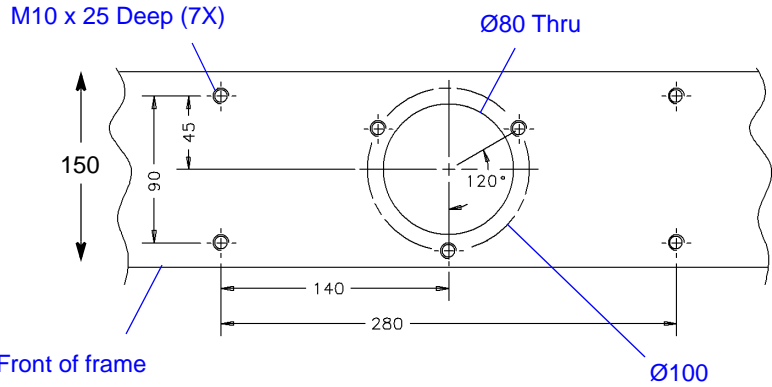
Series 5560 - Moving Crosshead Mounting Dimensions
